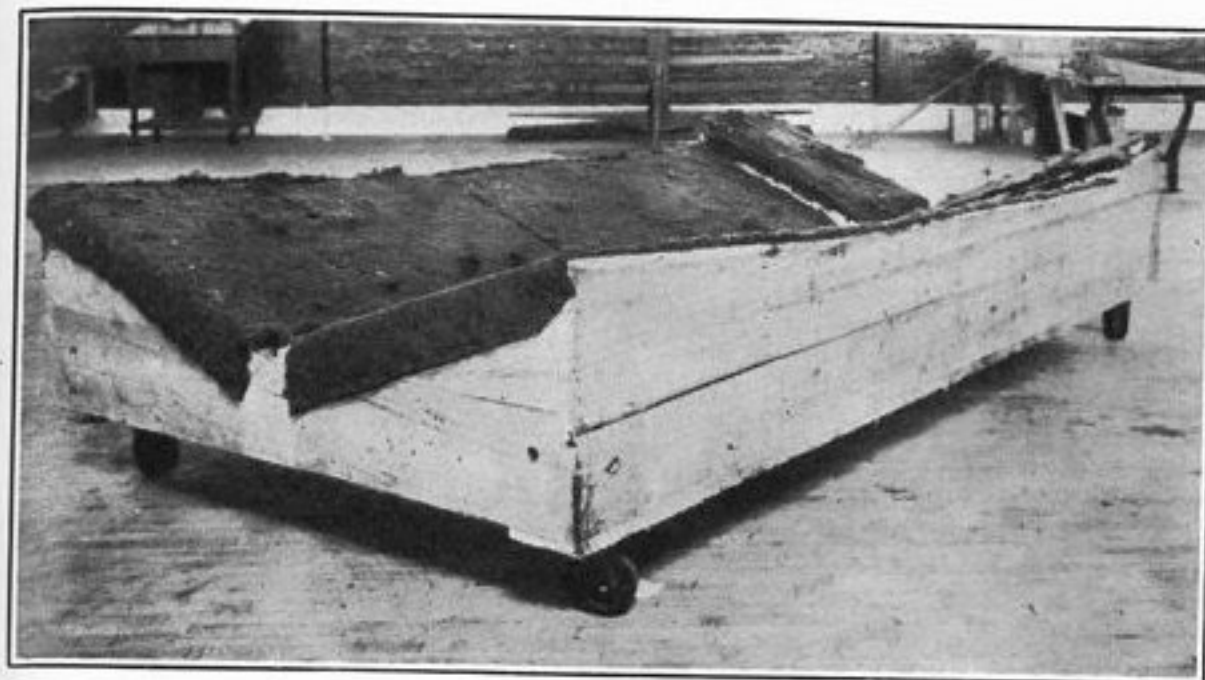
THREE-QUARTER VIEW OF CRADLE USED FOR HOLDING HULL DURING ASSEMBLY. BED IS SHAPED TO FIT HULL BOTTOM WITH STEP, AND PADDED WITH ONE-INCH SOFT FELT. CASTORS AT EACH CORNER FACILITATE SHIFTING OF HULL. USUAL METHODS OF LEVELING MAY BE EMPLOYED AFTER CRADLE IS PLACED IN POSITION.
